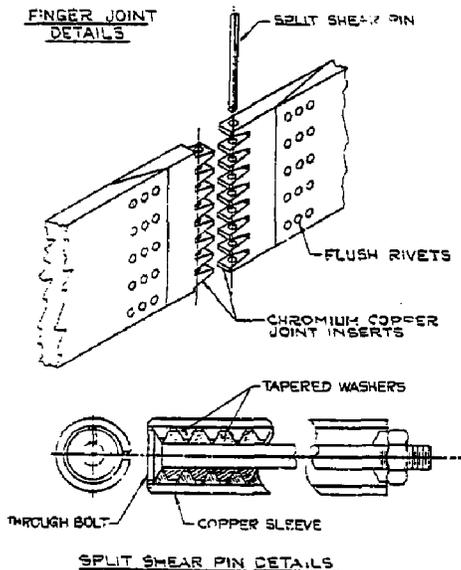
Details of the finger joint for the configuration of Fig. 6.
